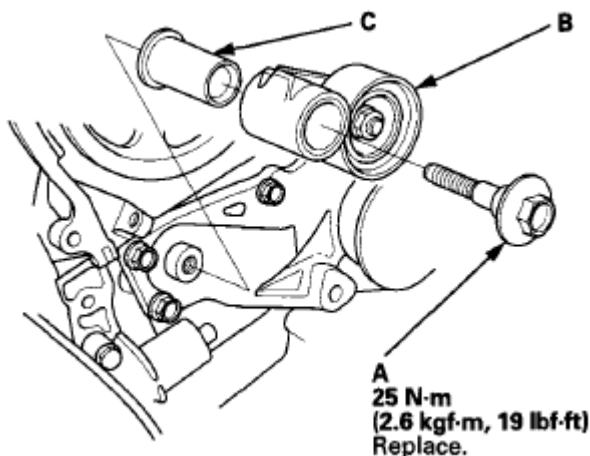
Removing Timing Belt Adjuster And Collar With Torque Specifications
